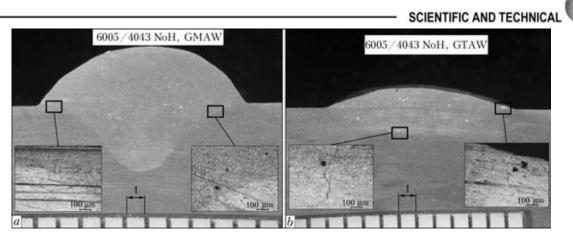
Macro- and microsections of the 6005 alloy joints GMA- (a) and GTA-welded (b) with 4043 filler at heat input of 440 (a) and 1290 (b) J/mm
